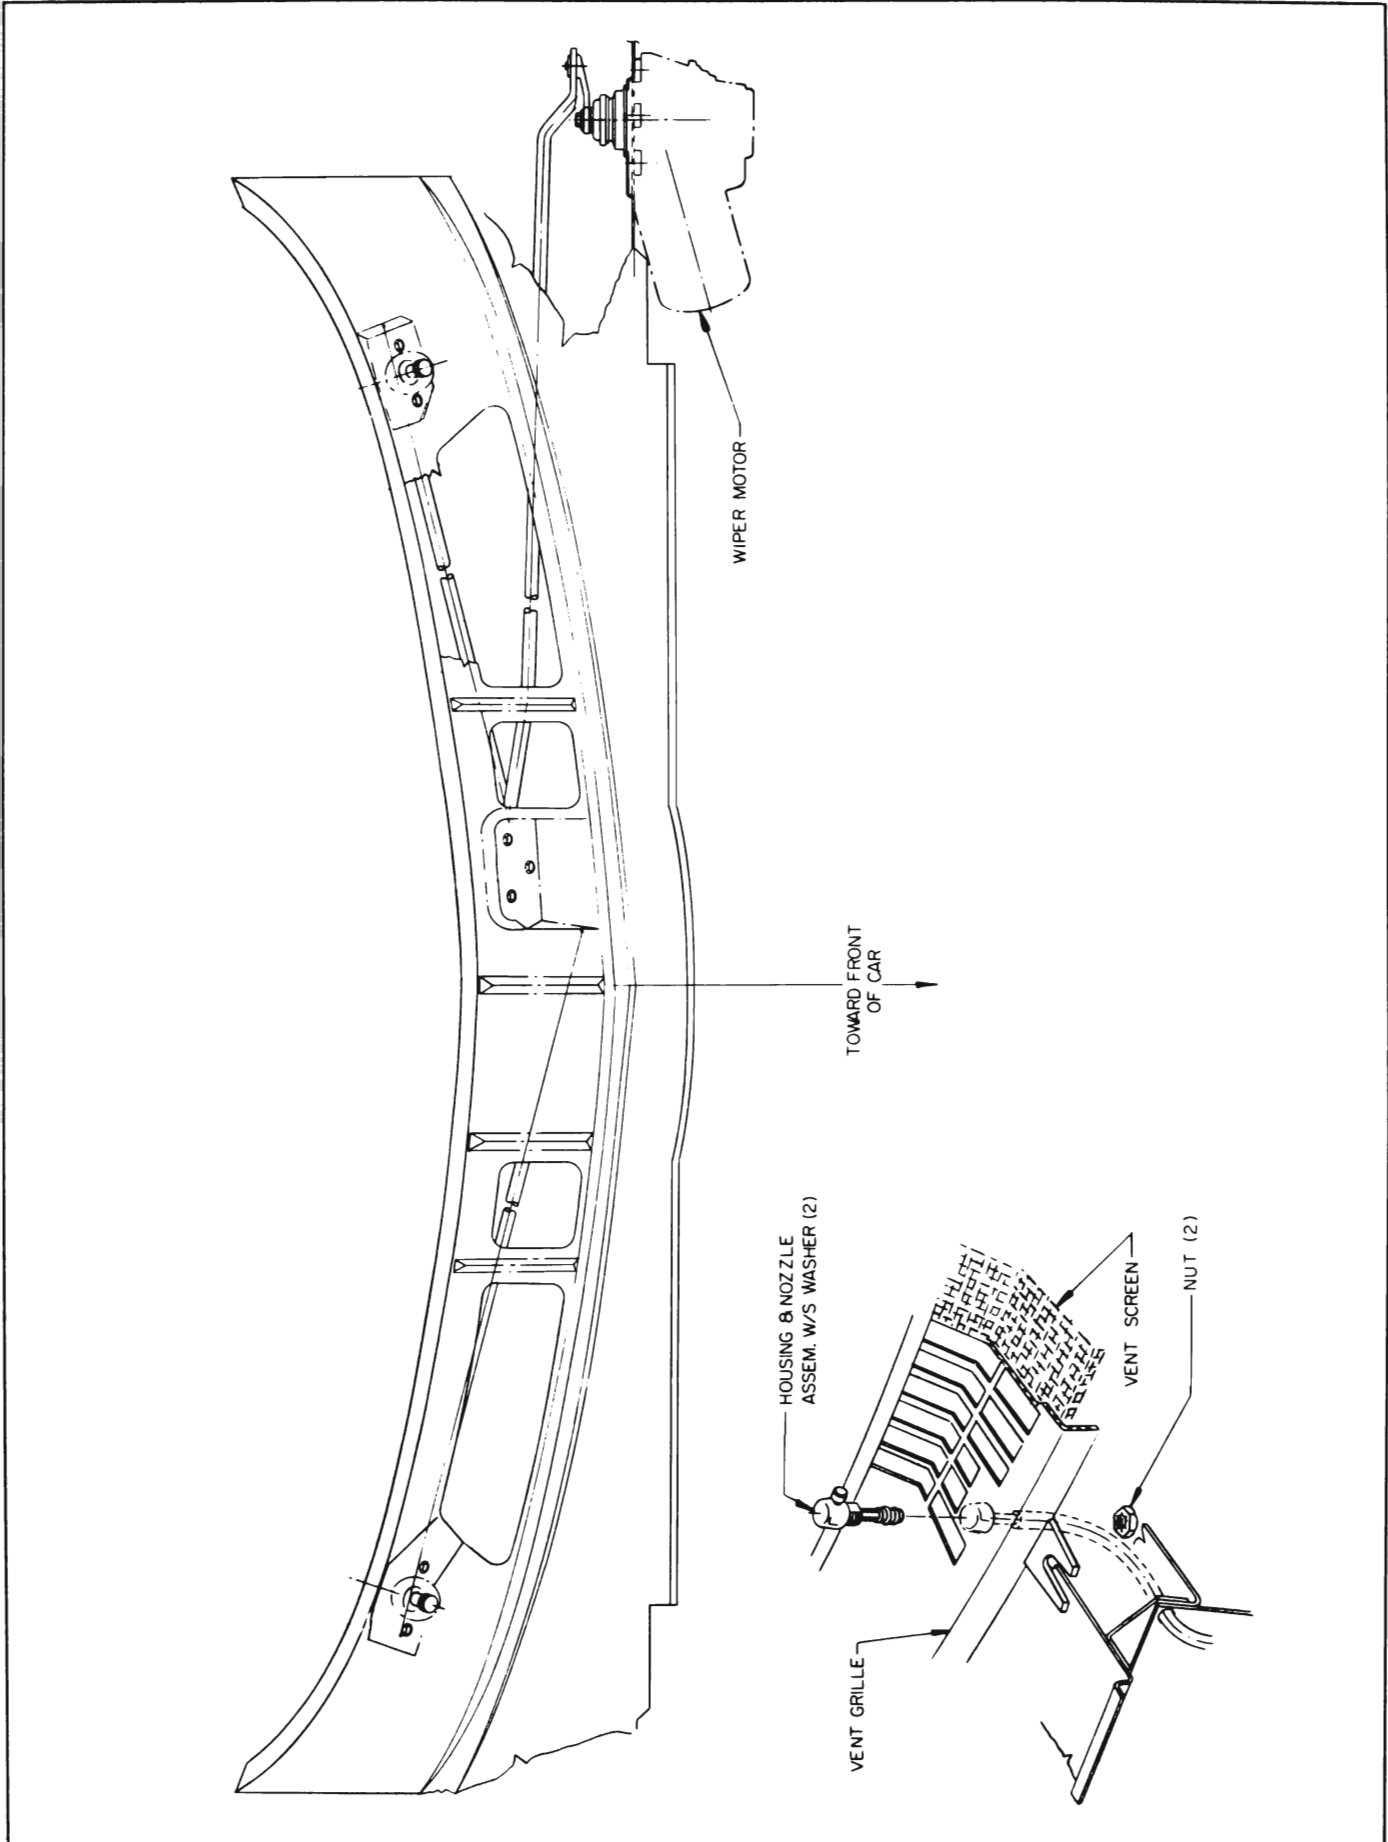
Windshield Wiper Linkage and Washer Nozzle Mounting—Riviera
